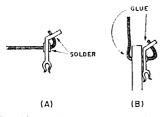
To add or replace a rotary switch contact, (A) solder a wire lead to the new contact, and (B) glue it to the switch wafer.
